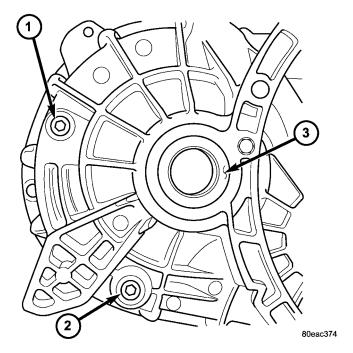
Transaxle Fluid Drain and Fill Plugs
